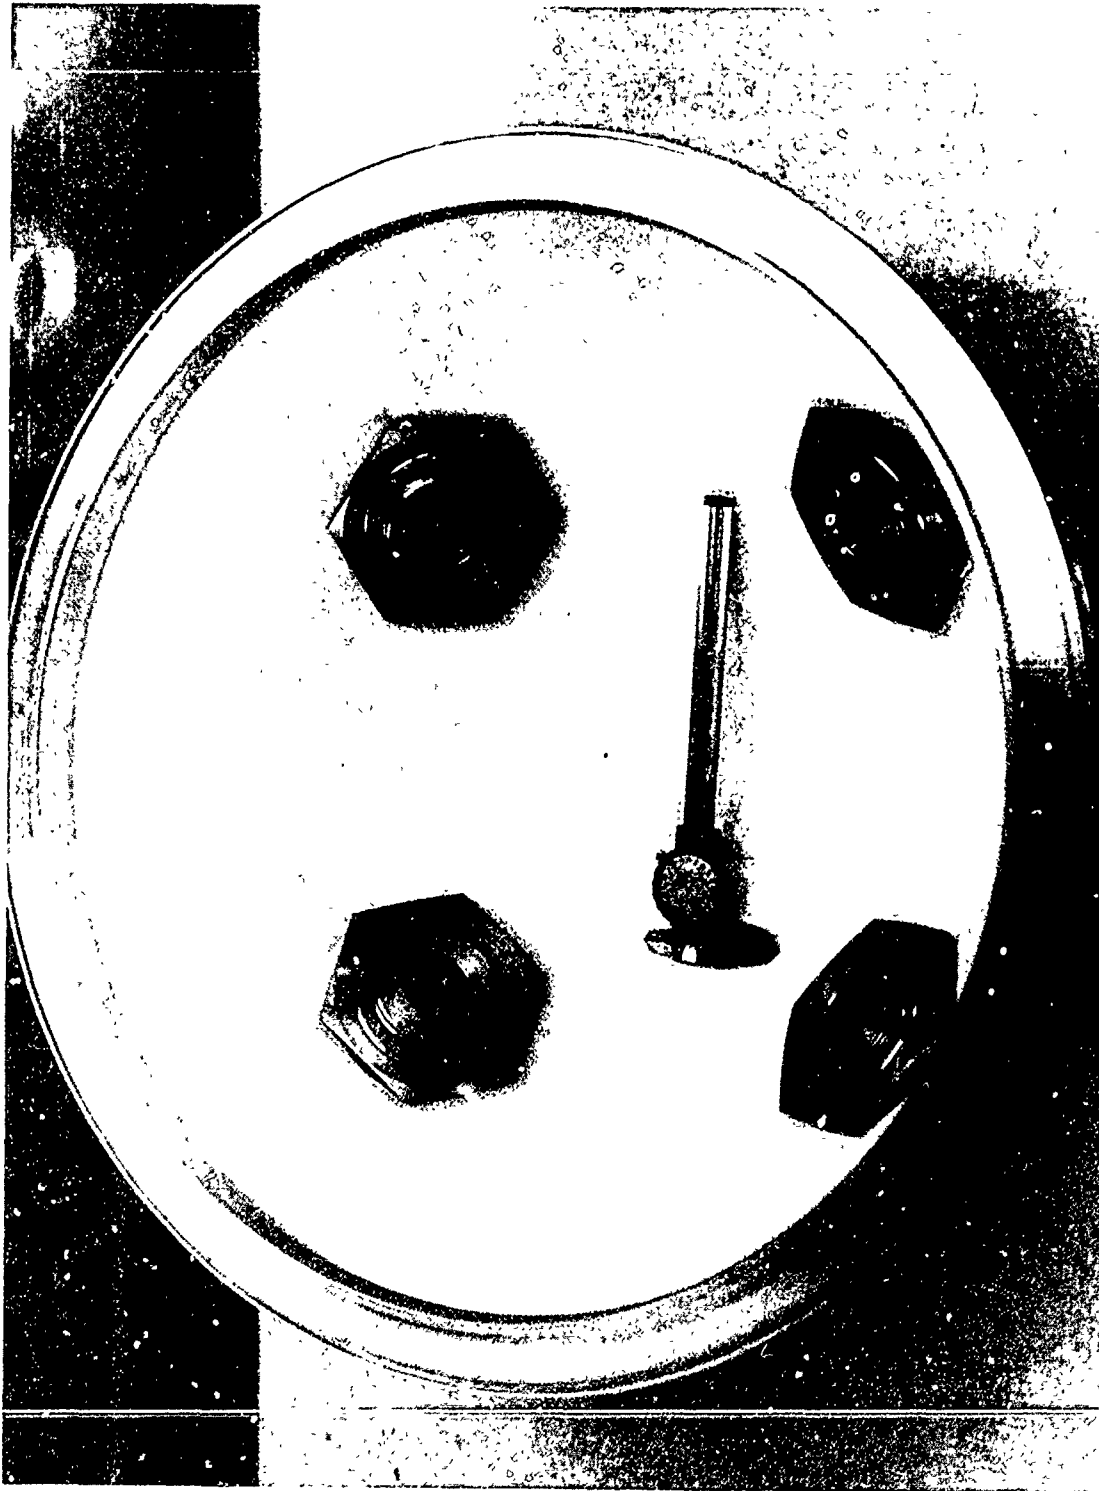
Interior view of the assembled Mod II hemispherical end closure for the 20-inch ceramic housing.
